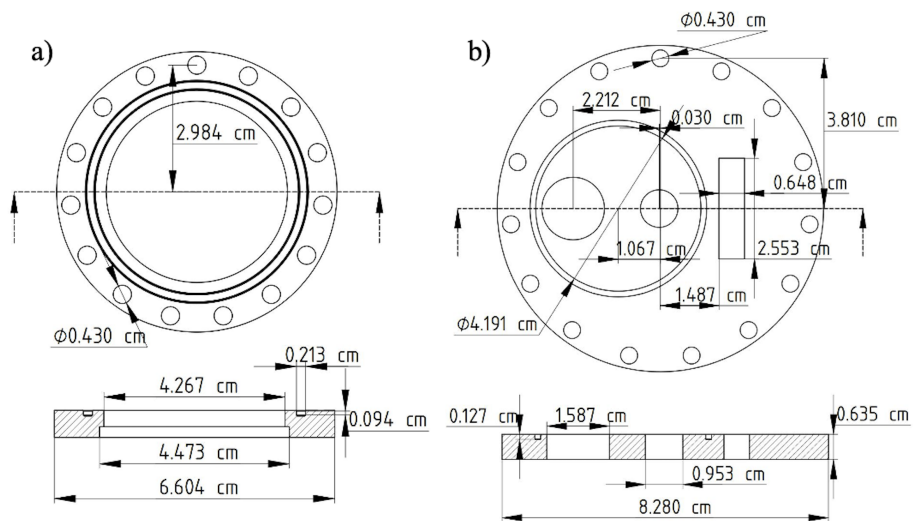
Engineering drawings of 6061 aluminum middle upper (left) flange and lower (right) flanges.
